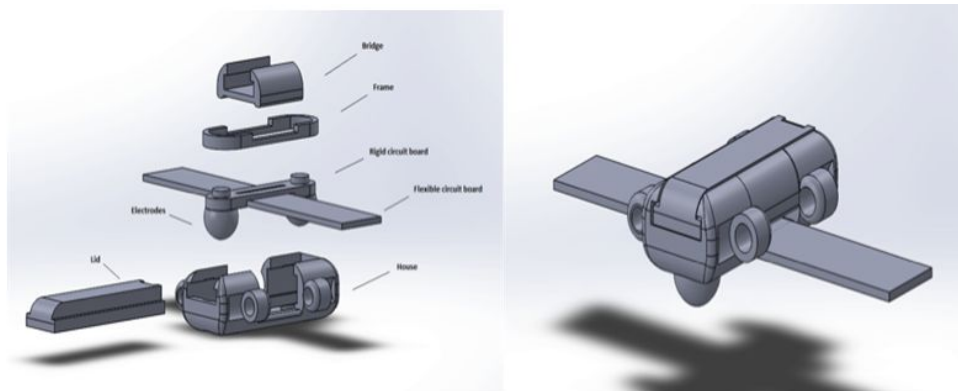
Prototype EMG Electrical Front End Housing: The final housing for the electrical components of our EMG analog front end. On the left is an exploded view and the right is a fully assembled version. Designed by collaborator Emma Vidarsson.
